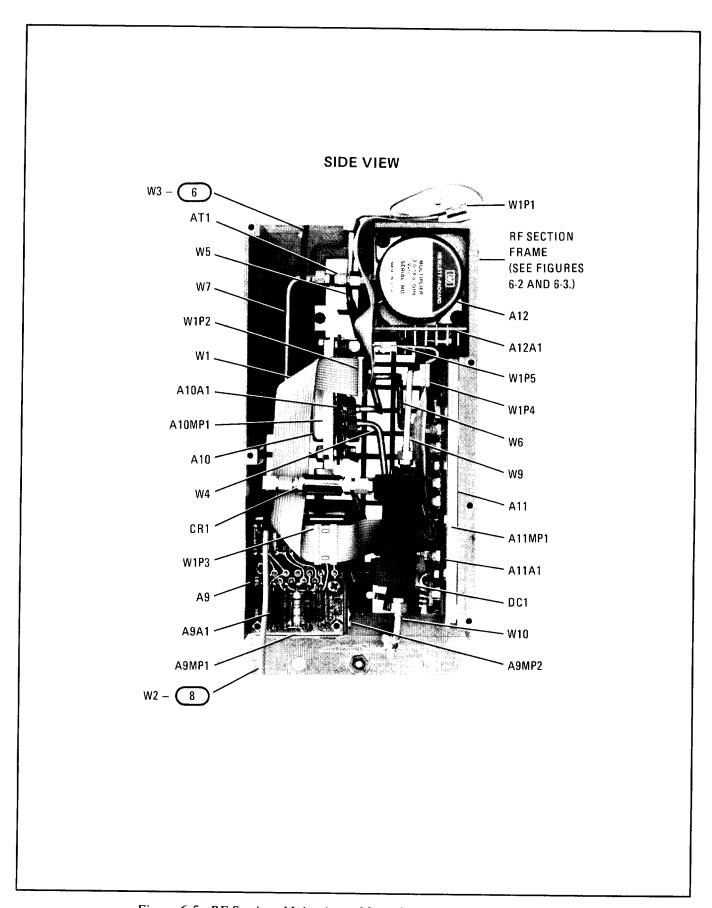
RF Section, Major Assembly and Component Locations (1 of 2)
